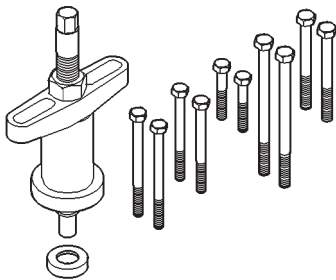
Crankshaft Pulley/Damper Installer Tool C3688
